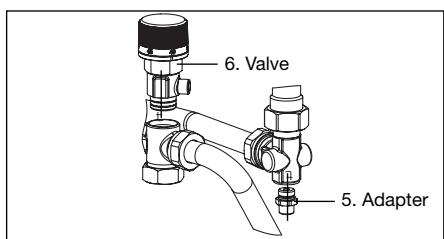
Removal of the single components 1341271 / 1341274
